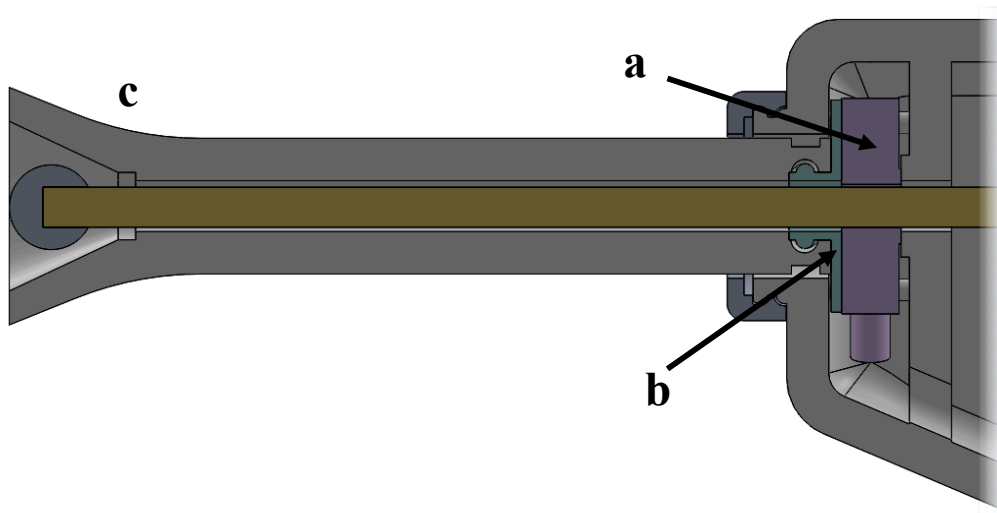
Rendered cross-section of the tool after design alteration highlighting the user-load sensor (a), threaded washer (b), and removable sheath with reference ring (c)
